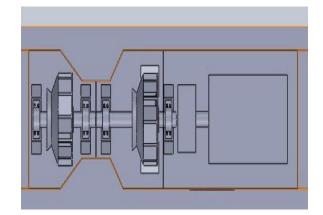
, Placement of machine, gear box, impeller for lift, impeller for thrust and holder (top view)
